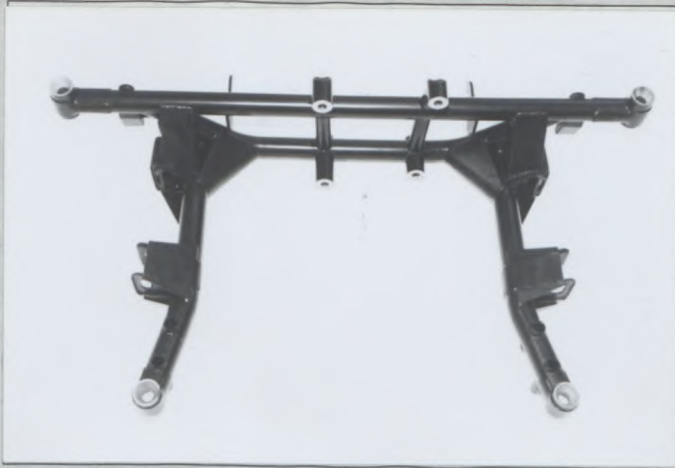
(REAR TOP MOUNTING PLATE)
